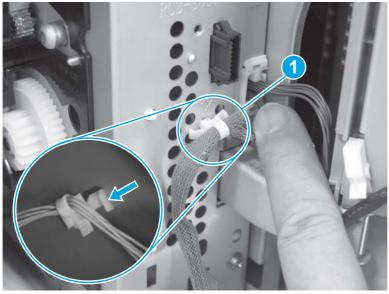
Remove the multipurpose tray (Tray 1) drive assembly (10 of 13)
